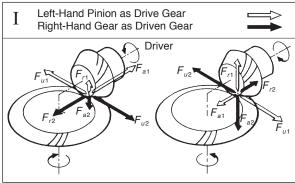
The Direction of Forces Carried by Spiral Bevel Gears (1)
